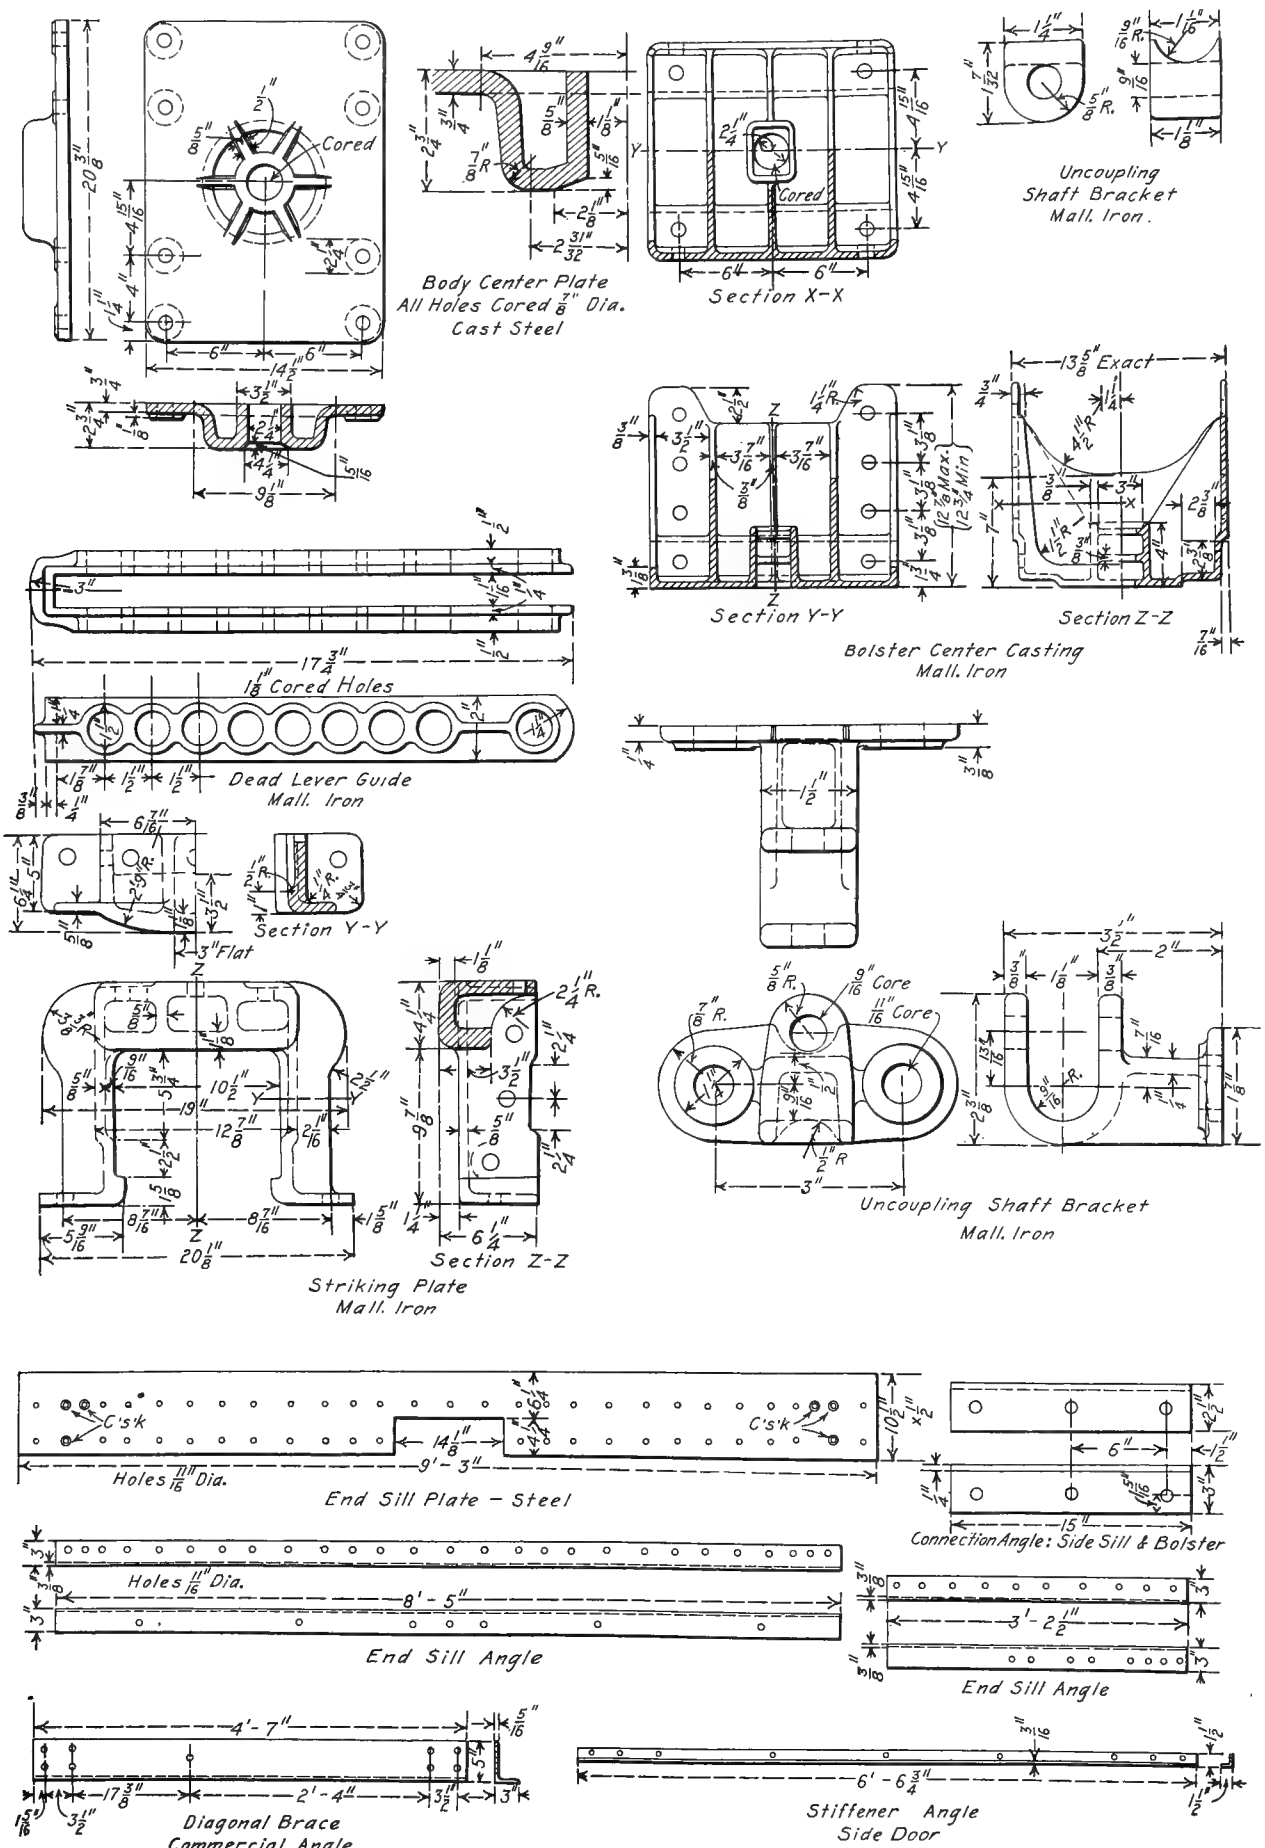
Details Used on New York Central Steel Underframe Box Car Shown in Figs. 279 and 280.
